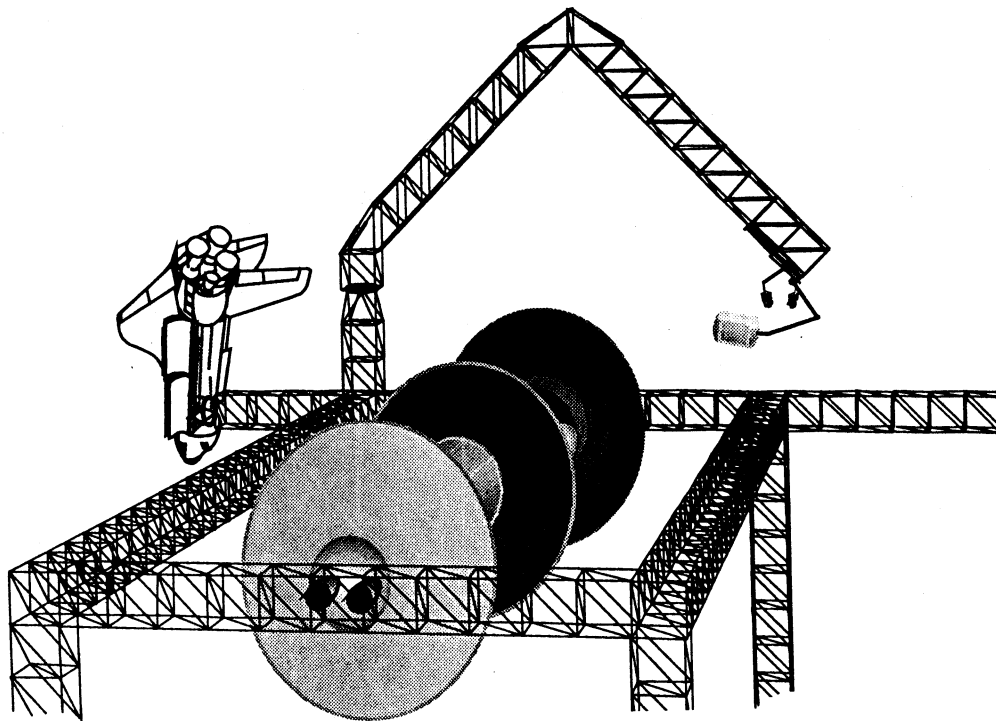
Interplanetary spacecraft assembly using Mobile Transporter and Space Crane.
